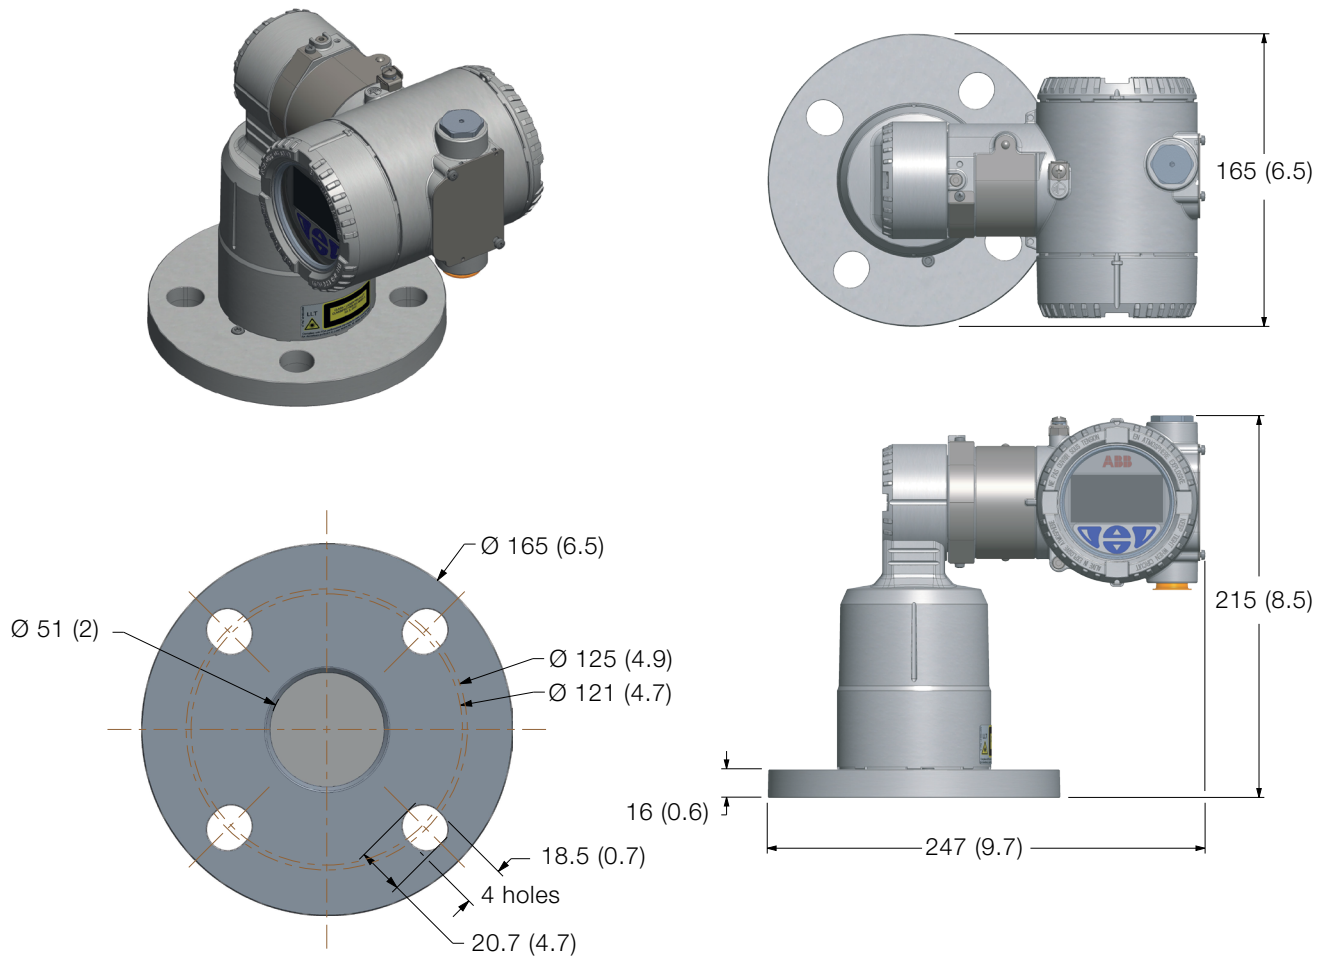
LLT100 with universal flange (aluminum and stainless steel)
